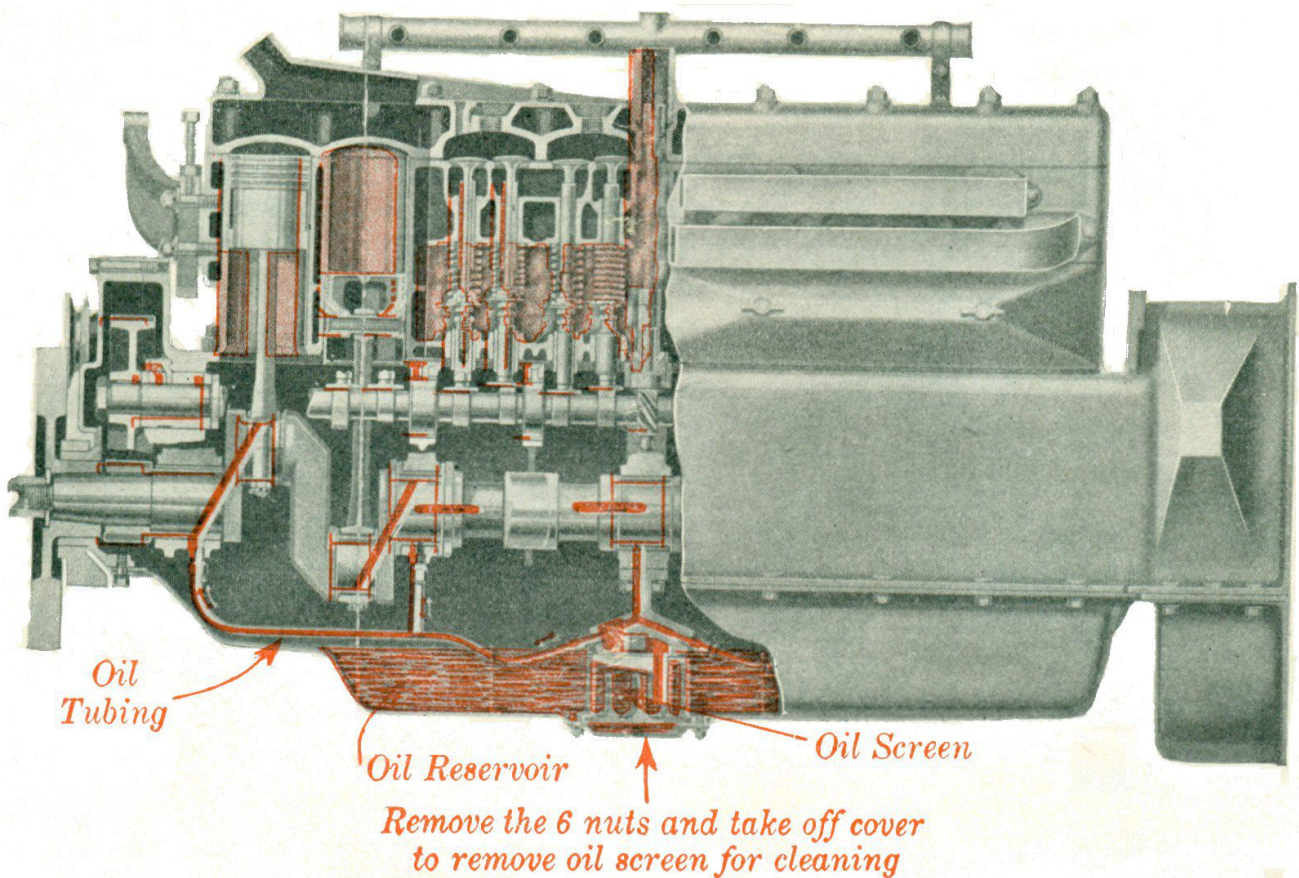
Longitudinal sectional view of engine showing oiling system, valve mechanism and general construction.
